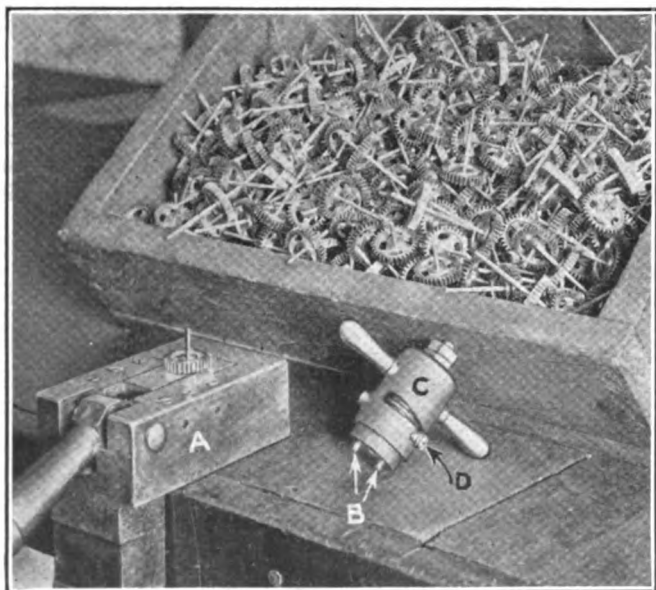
TESTING FIT OF WHEEL ON SHAFT
